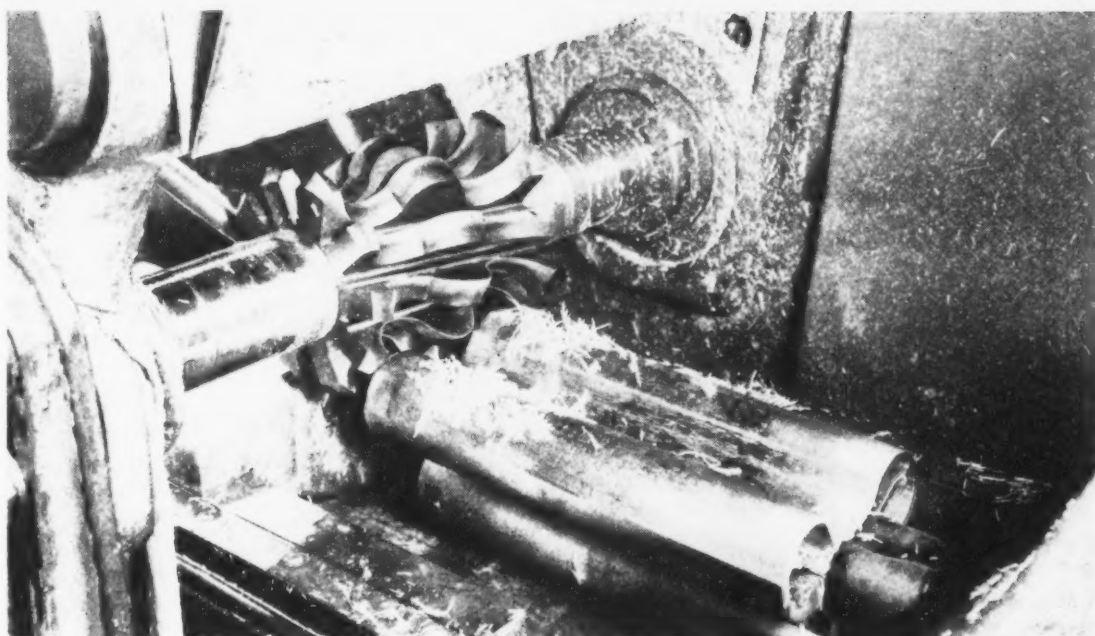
Rough milling of cast aluminum rotor lobes is done with a formed fluted cutter. The work is held in an air clamping fixture and fed from the underside. Cutter, of high speed steel, turns at 183 rpm to rough mill arc.
